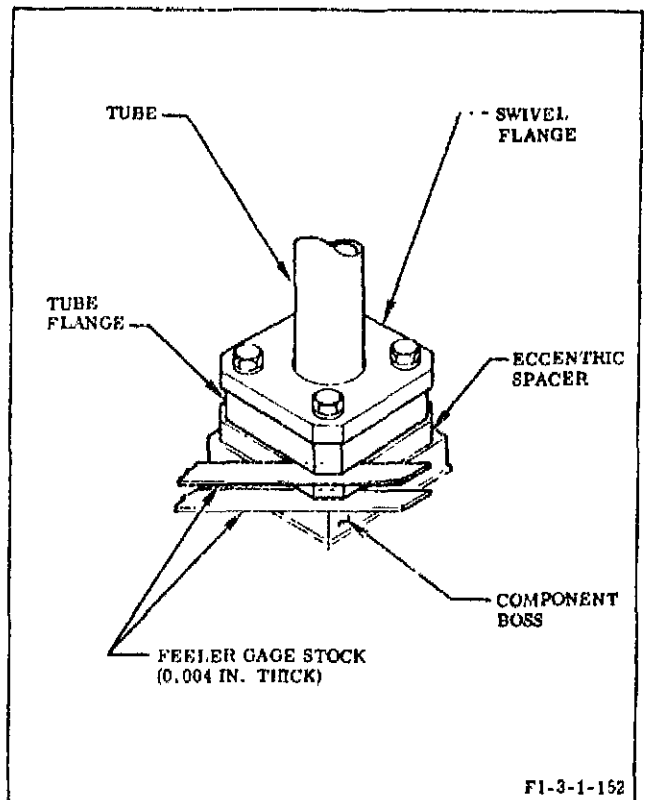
Preparing Igniter Fuel Supply and Engine Supply Tube Joints for Leak Testing
